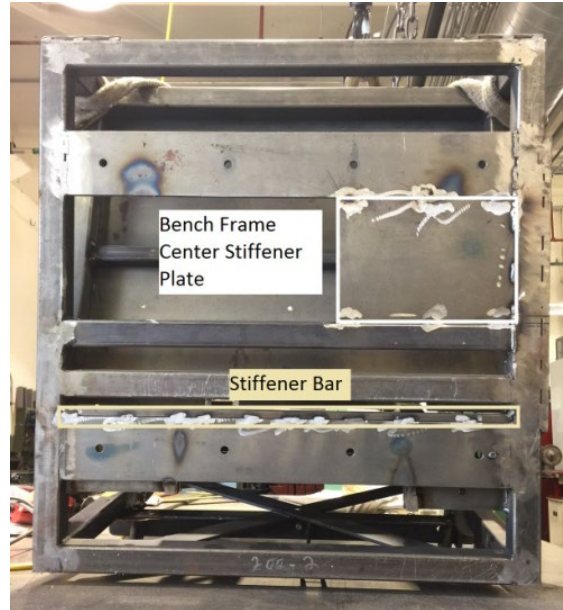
Bench Frame Assembly (2921-310) bottom view showing outlines of the Bench Frame Center Stiffener Plate (2921-314) and the Stiffener Bar
